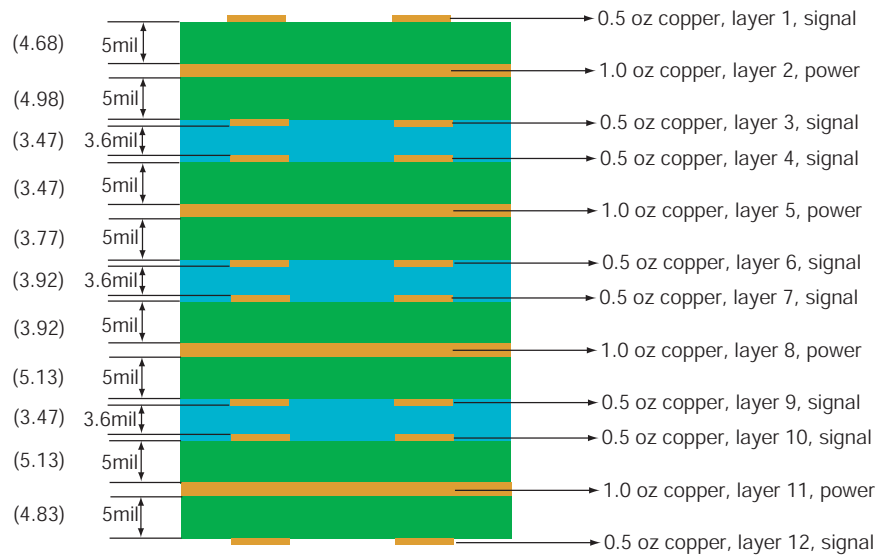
Stack-up design of the mother board. The PCB board manufacture www.2justforyou.com measured the layer thickness of the actual finished board, and the results are shown inside brackets in unit of mils.
